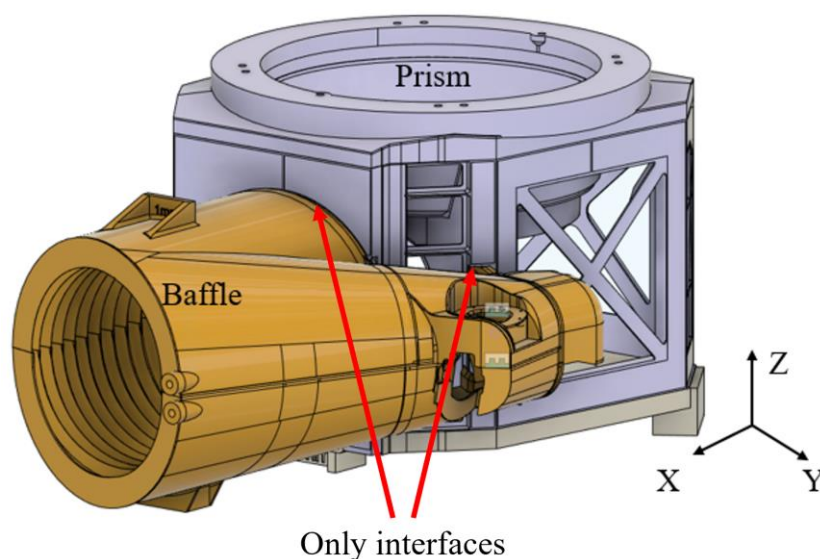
ITS demonstrator redesign CAD model, which is additive manufacturable [WIL-23]
